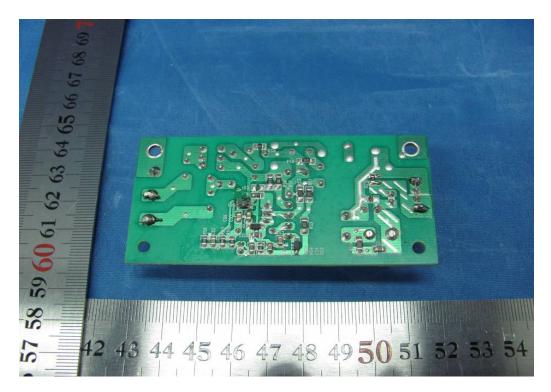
COMPONENT SIDE VIEW OF OPEN FRAME MODEL(Second structure)
